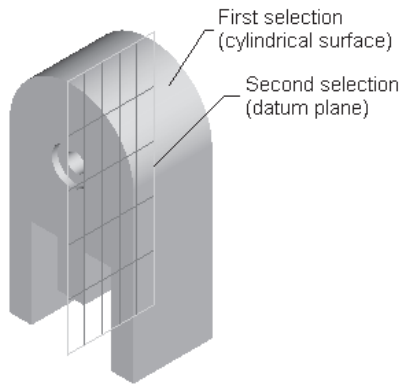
Selecting a cylindrical surface and a default datum plane to create a datum plane
